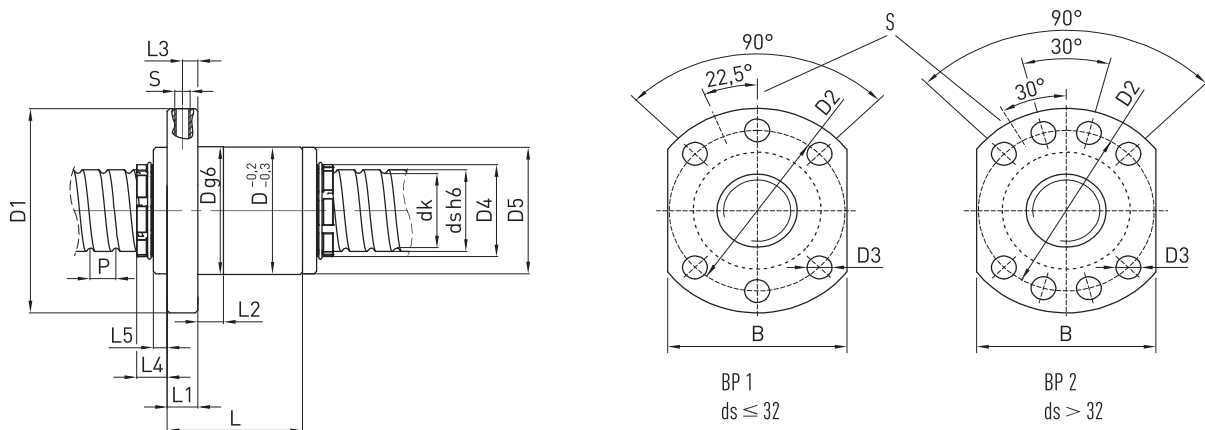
Flange single nut DEB-x with Wiper K and V
